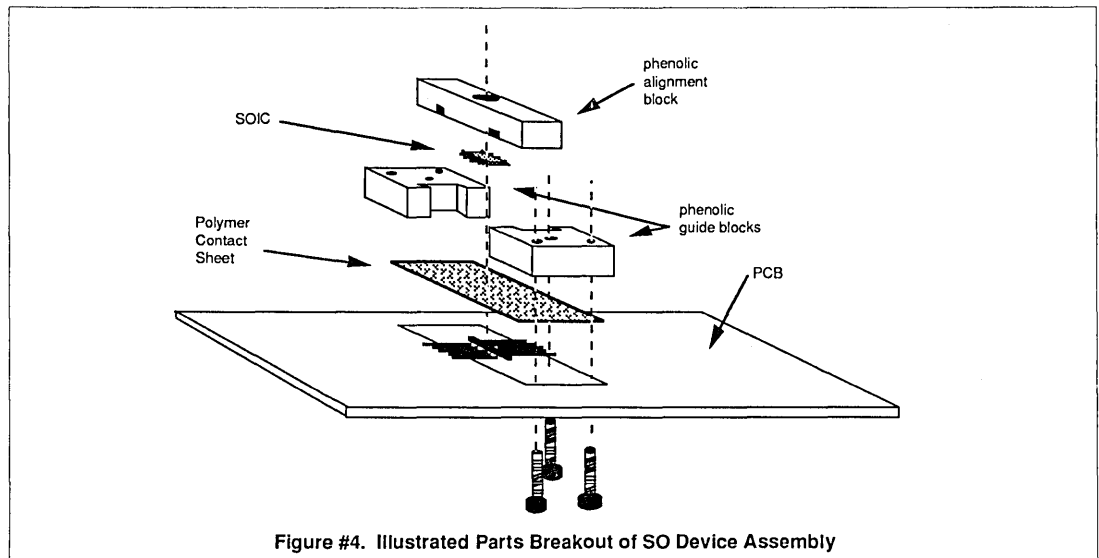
Illustrated Parts Breakout of SO Device Assembly
